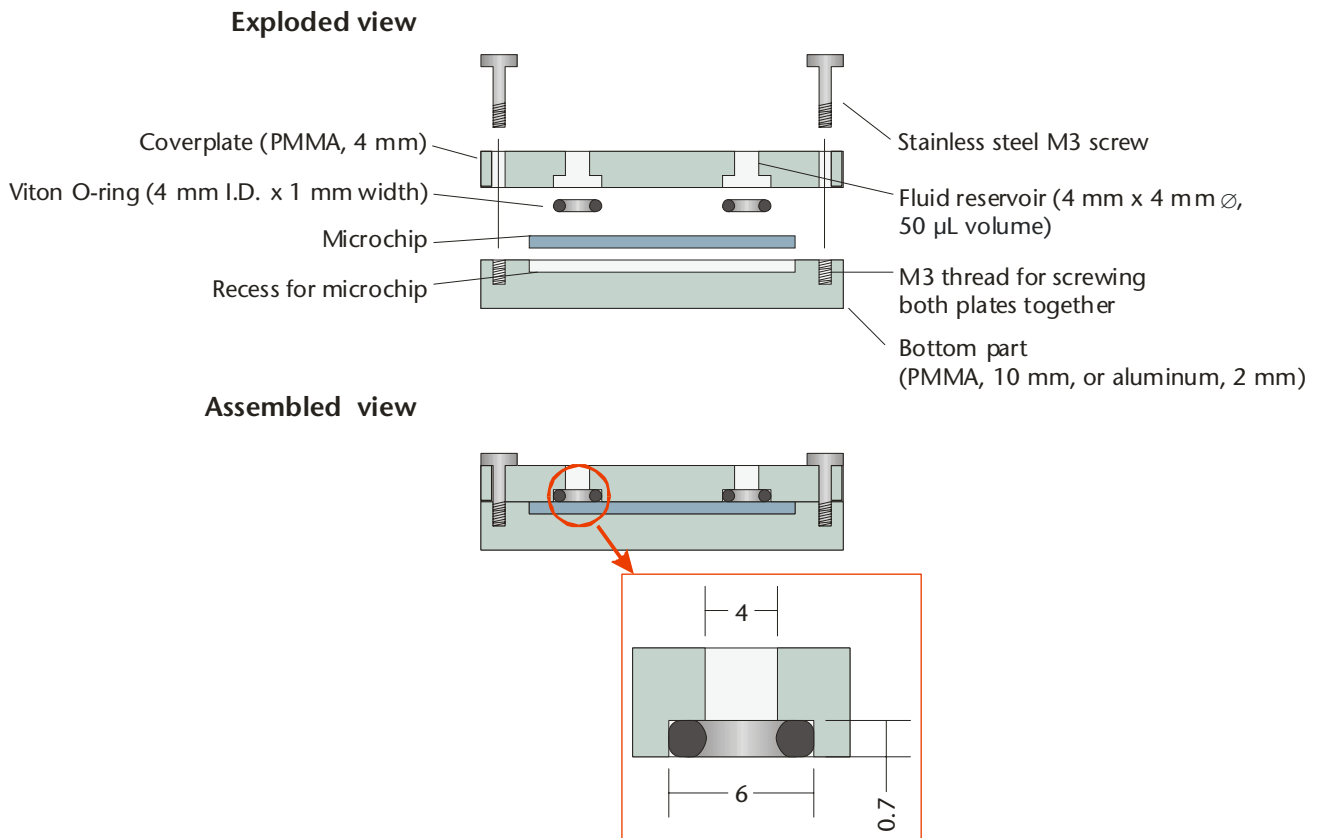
Cross-sectional view of the chip holder for microfluidic devices. Fluid reservoirs are made by holes in the cover plate and an O-ring seal with the chip surface (see inset at the bottom). Dimension in the inset are in mm.
